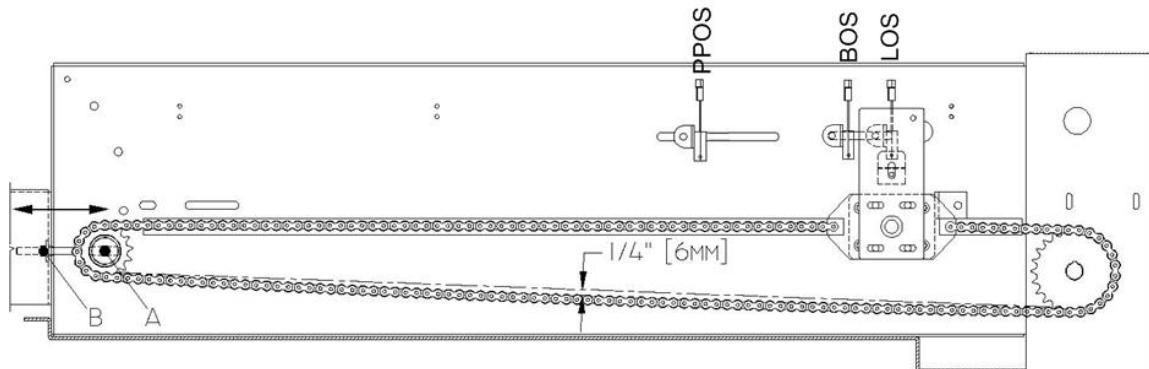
Pin Brake Adjustment*Procedure 2-8 - Pin Brake Adjustment
